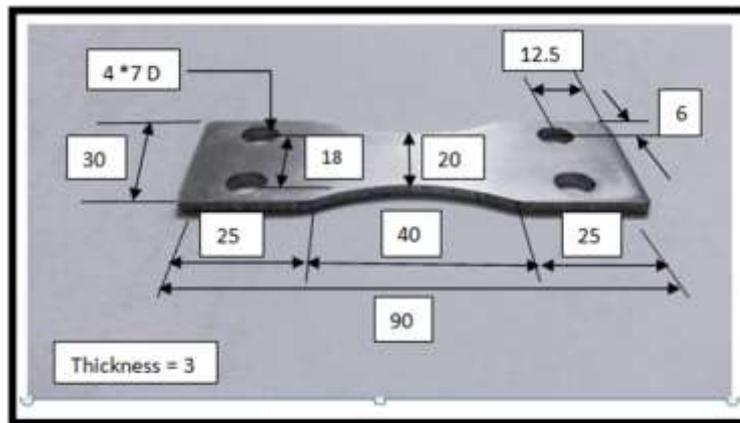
, Geometry of fatigue specimens dimensions are in millimeter
